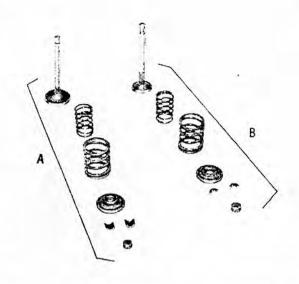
VALVE ASSEMBLIES A. INLET B. EXHAUST
